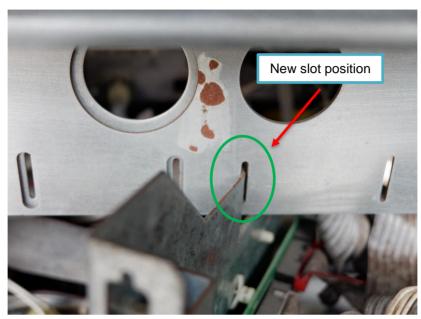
c – Relocated the PCB board to the center position of dispenser.
